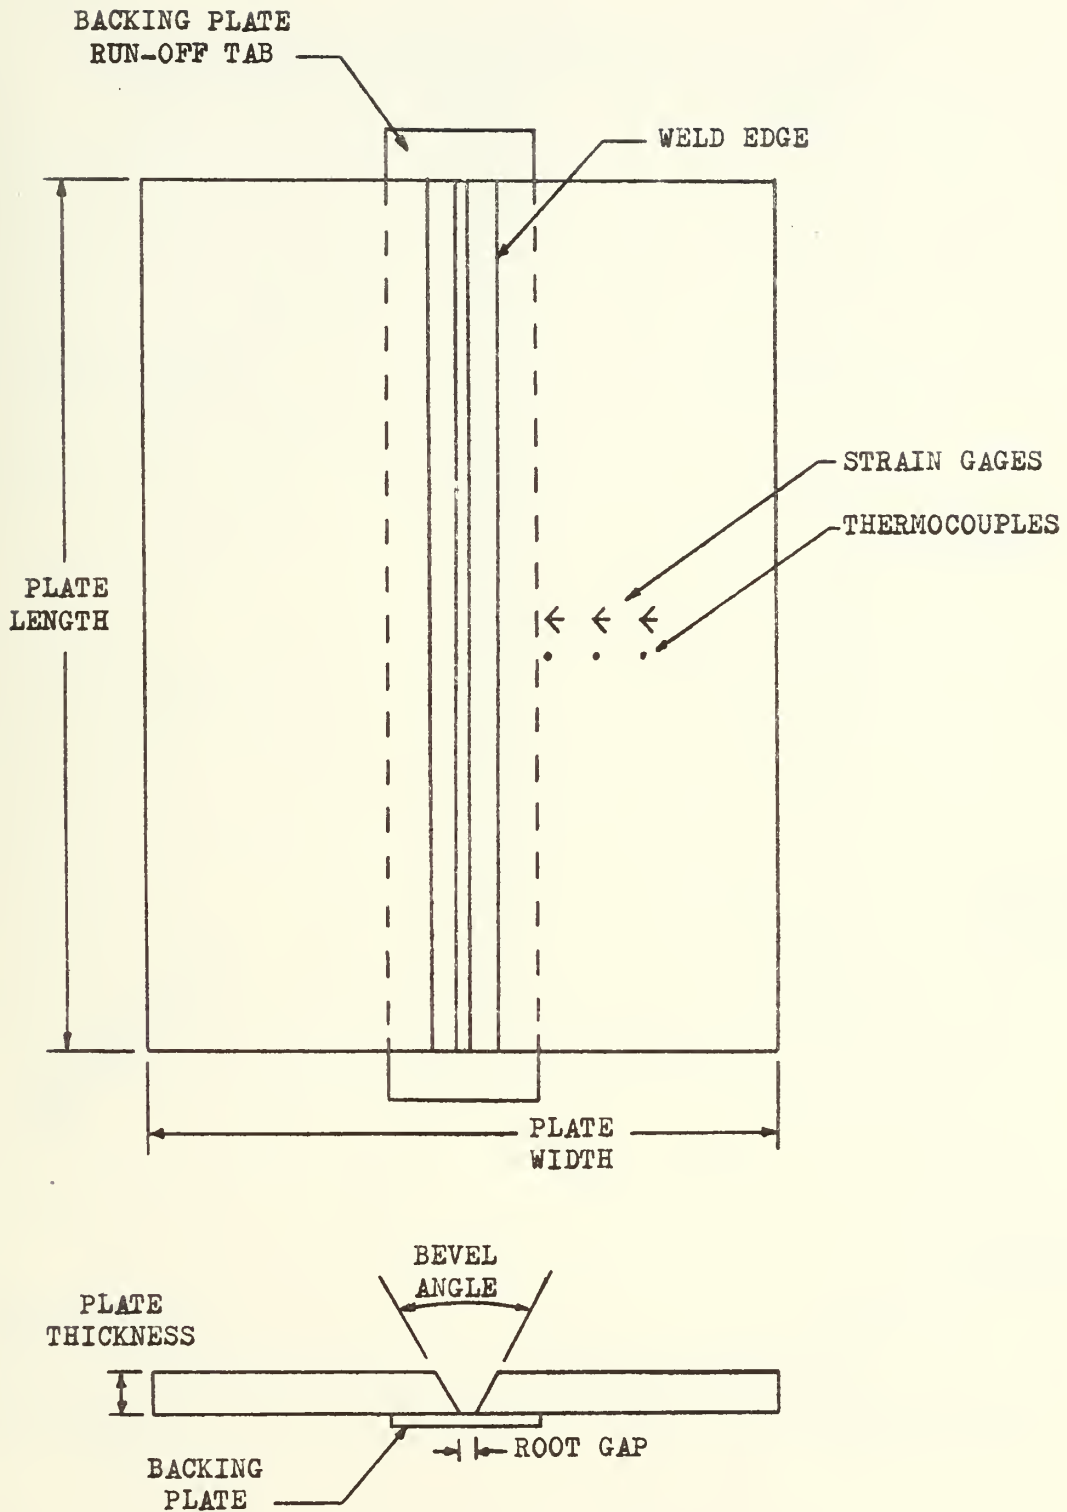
TEST PLATE AND JOINT GEOMETRY.
